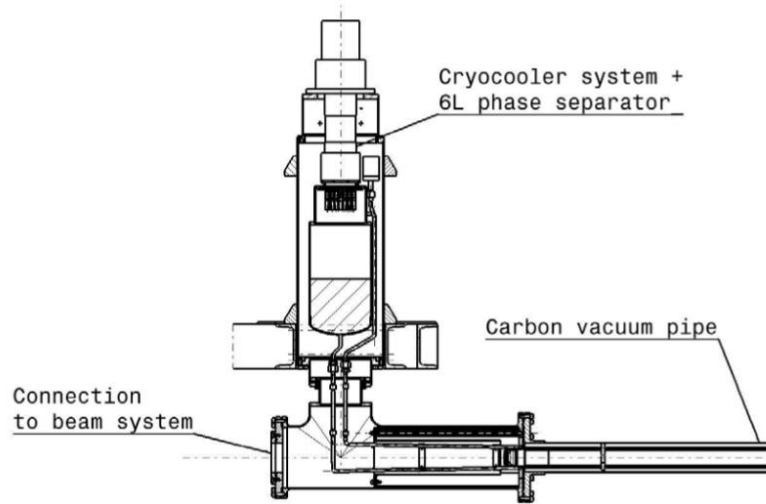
Vacuum enclosure and cryocooler installation from [2].
